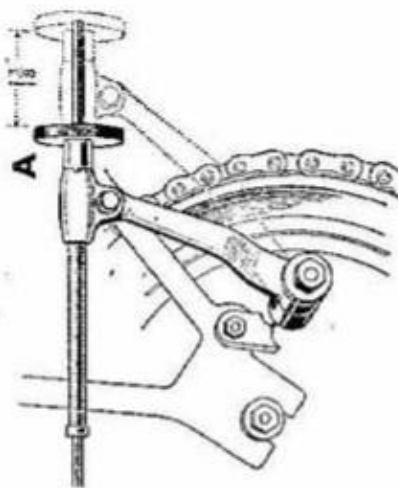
HAND ADJUSTMENT OF REAR BRAKE (SHOWN EXHAUSTED)
